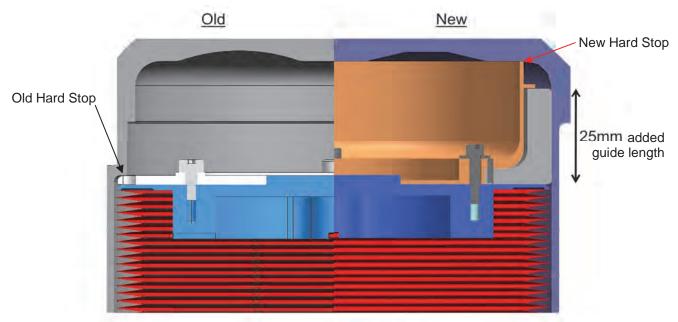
Original and Final designs of the end of the bellows assembly. The figure shows the bellows stroked to the maximum fluid condition and against the end-of-stroke hard stop for both design versions
